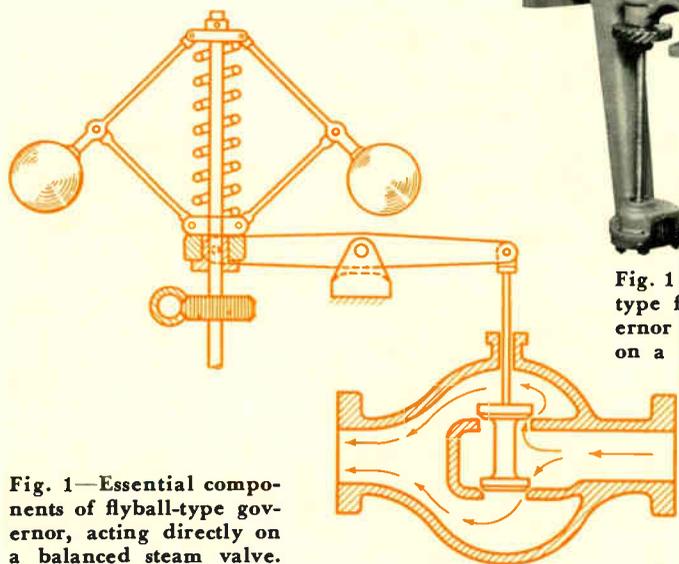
Essential components of flyball-type governor, acting directly on a balanced steam valve.
